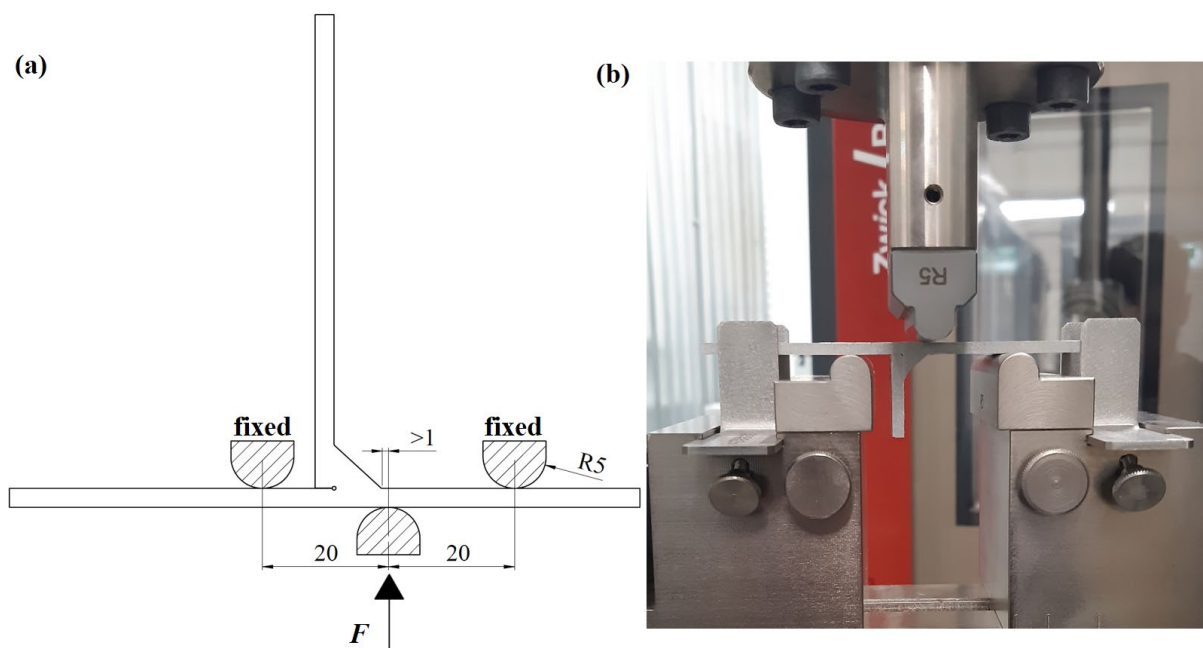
T-joint specimen HCF 3-point bending: (a) testing setup, (b) specimen in the device
